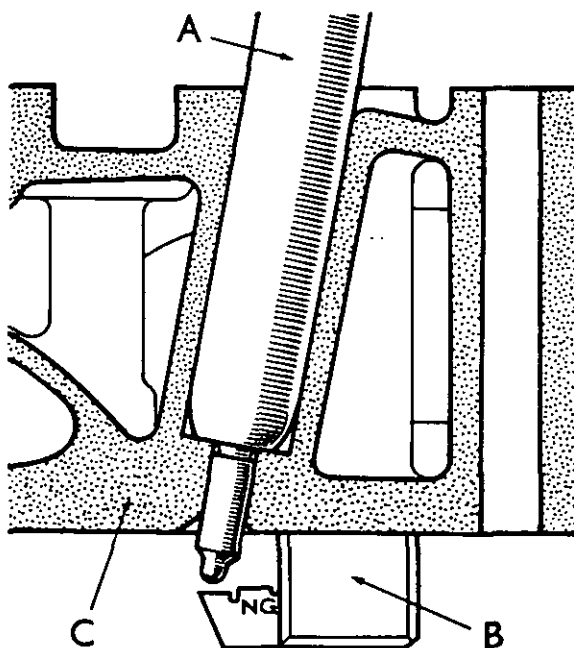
CHECKING THE CYLINDER HEAD BEFORE REFACING
